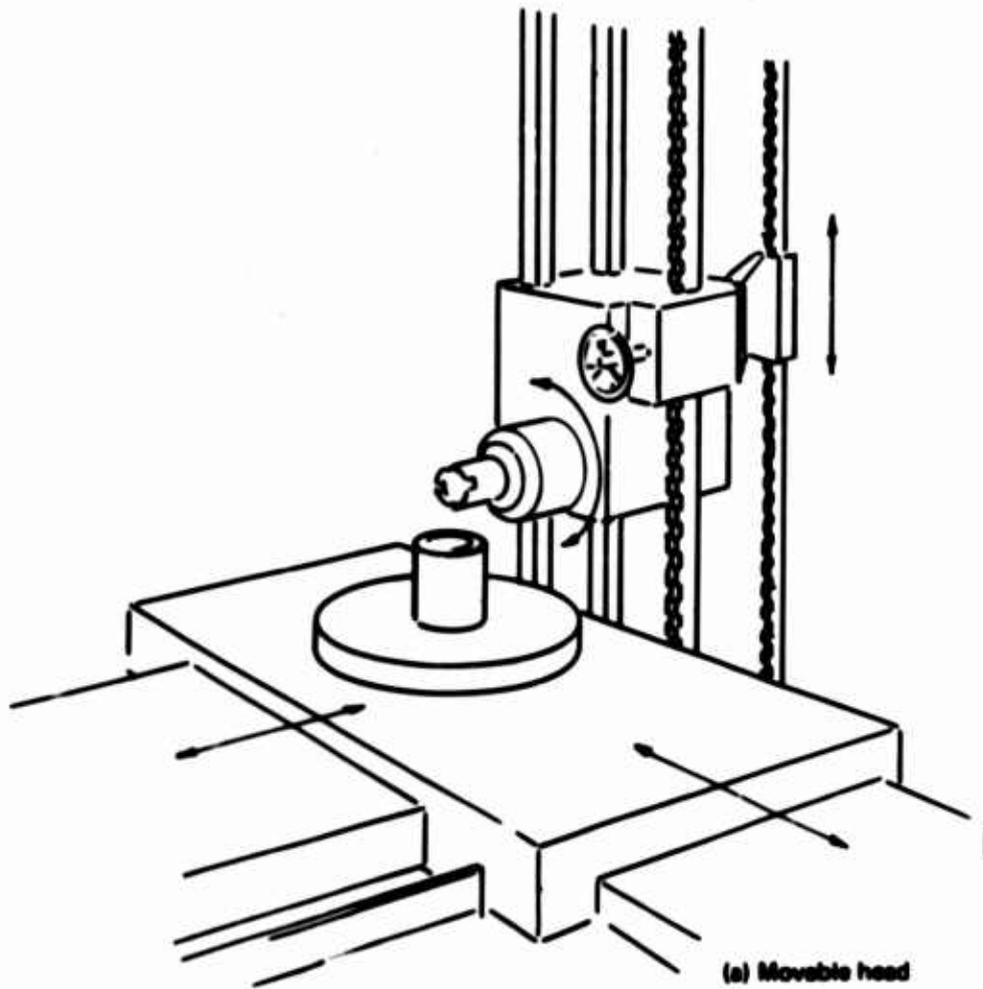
Milling machines—Illustrating degrees of freedom in movement similar to those required in seafloor milling machines.
